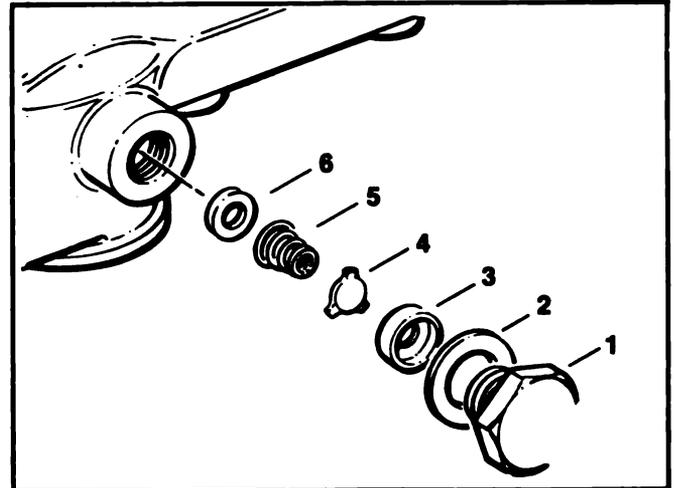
Remove The O-Ring From The Filter End Of The Housing.
